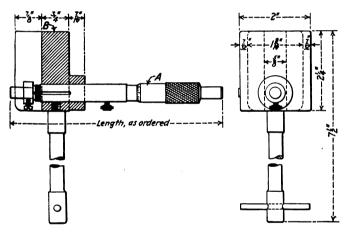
Inside Micrometer Calipers with Special Attachments for Measuring Wheel Bores
